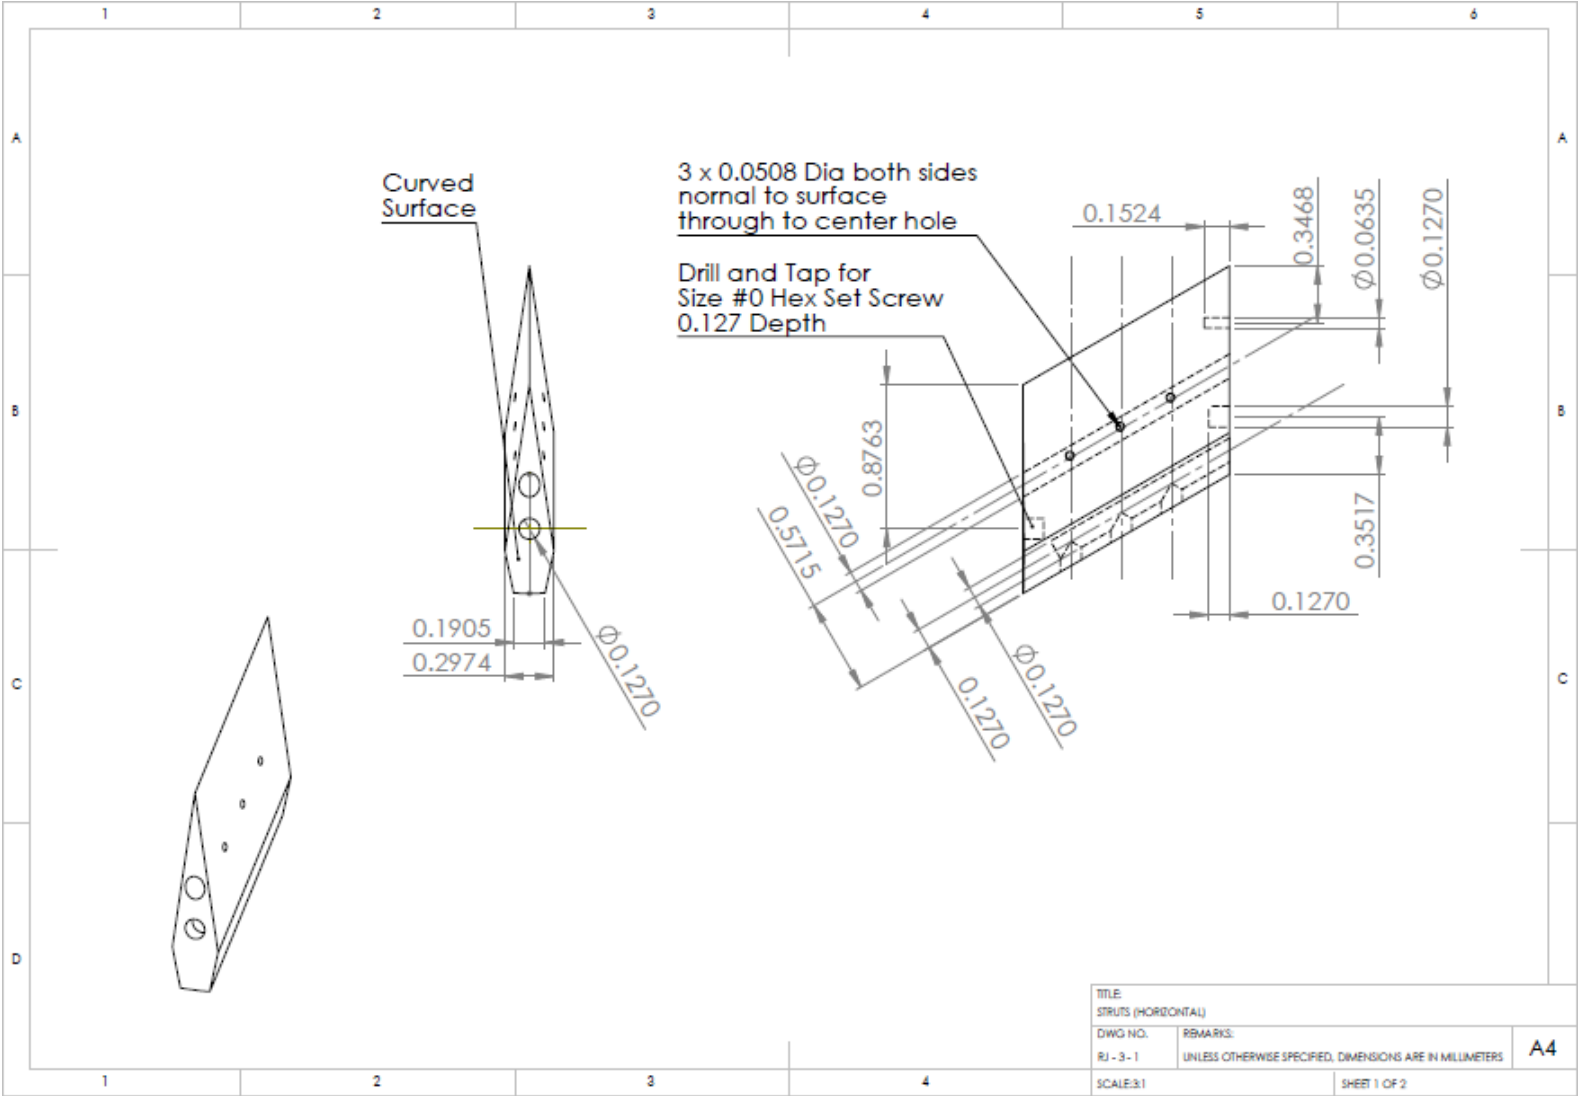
Part drawing: Ranjet horizontal struts (RJ – 3 – 1)
